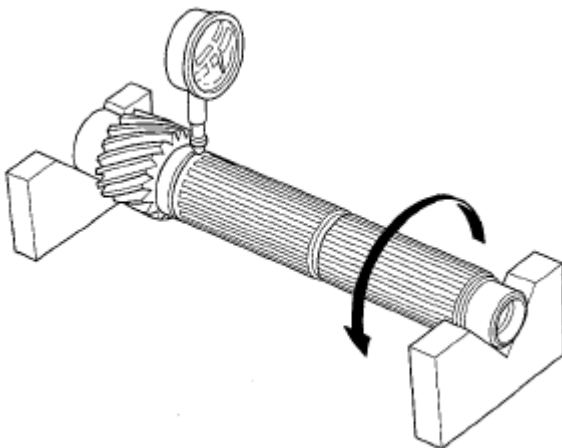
Inspecting Runout With Supporting Both Ends Of Countershaft
